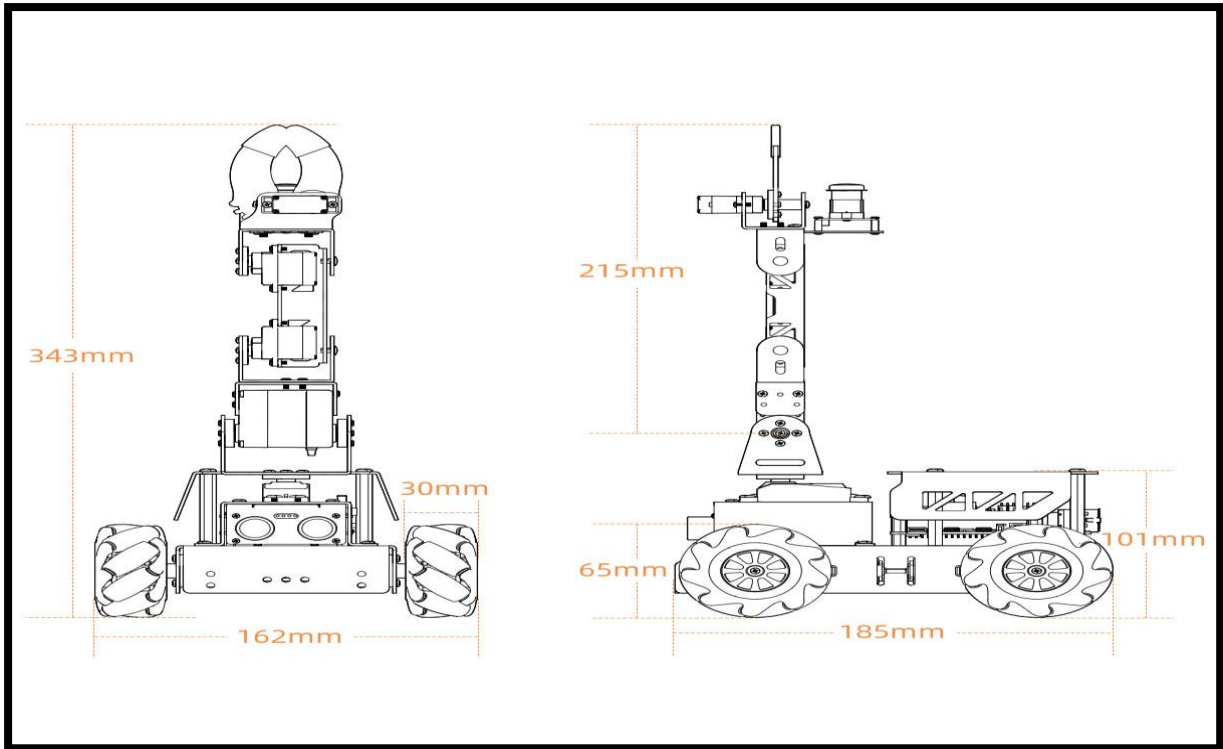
Dimensions of the "ResQBot" AI Vision Robot Arm with Mecanum Wheels
